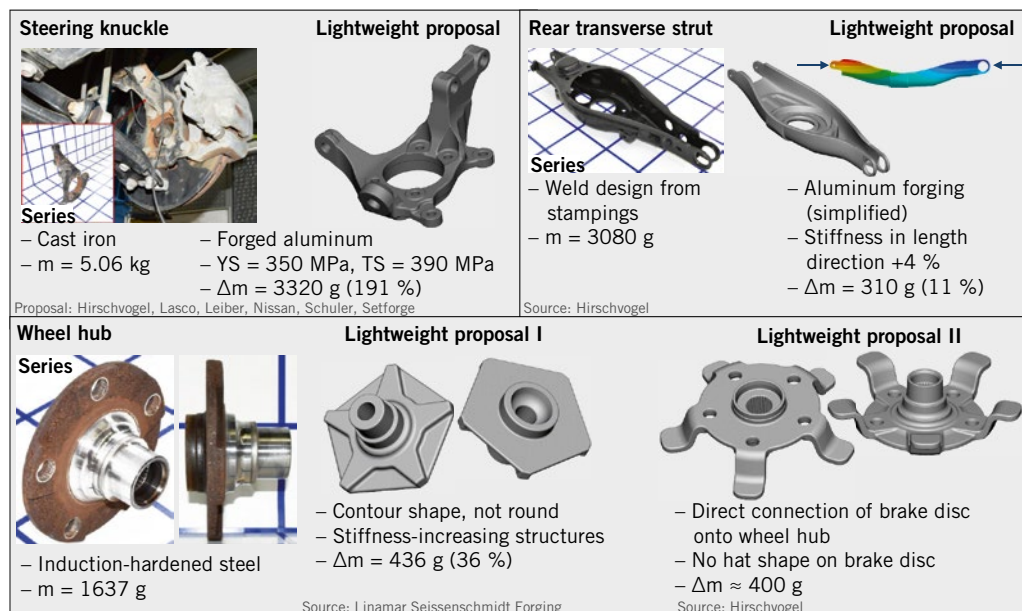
Lightweight design potential in the chassis – steering knuckle and wheel carrier, rear transverse strut as well as wheel hub (© Lightweight Forging Initiative)
